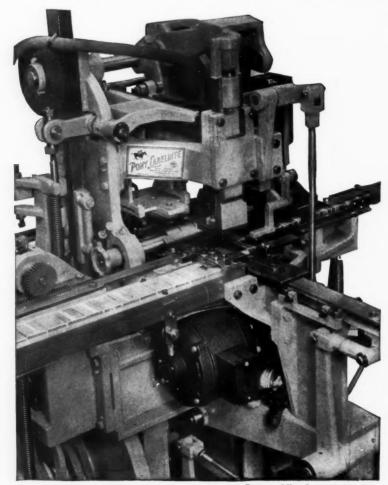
Close up view of the hand oil pump which provides lubrication for some forty bearings on a bottom scaler.
